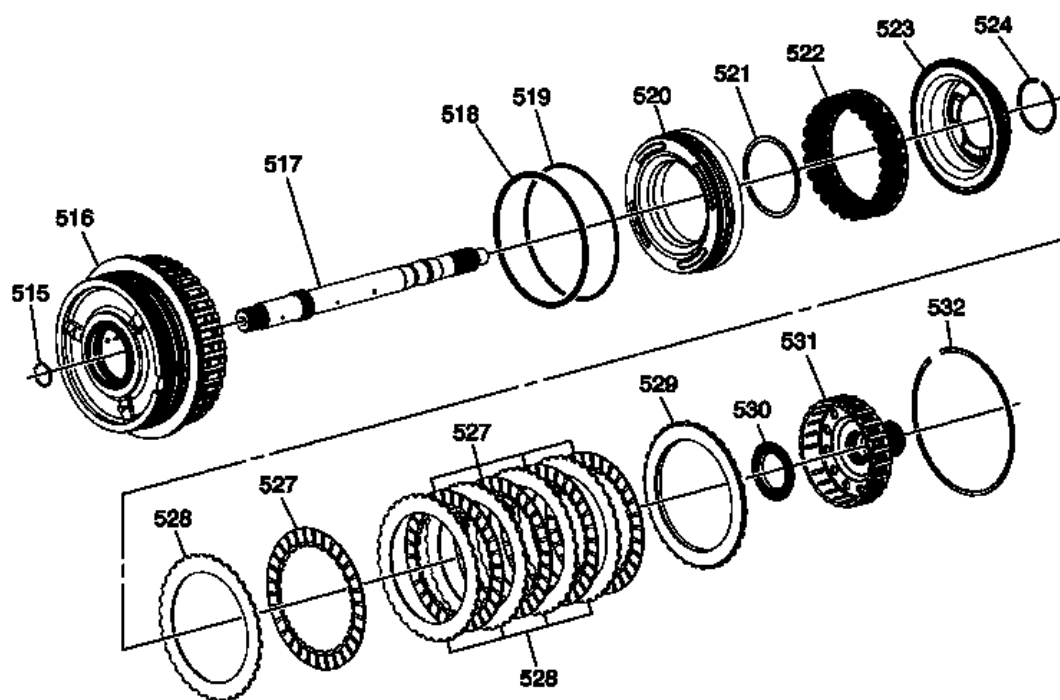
4-5-6 Clutch Assembly Components -- Gen 2
